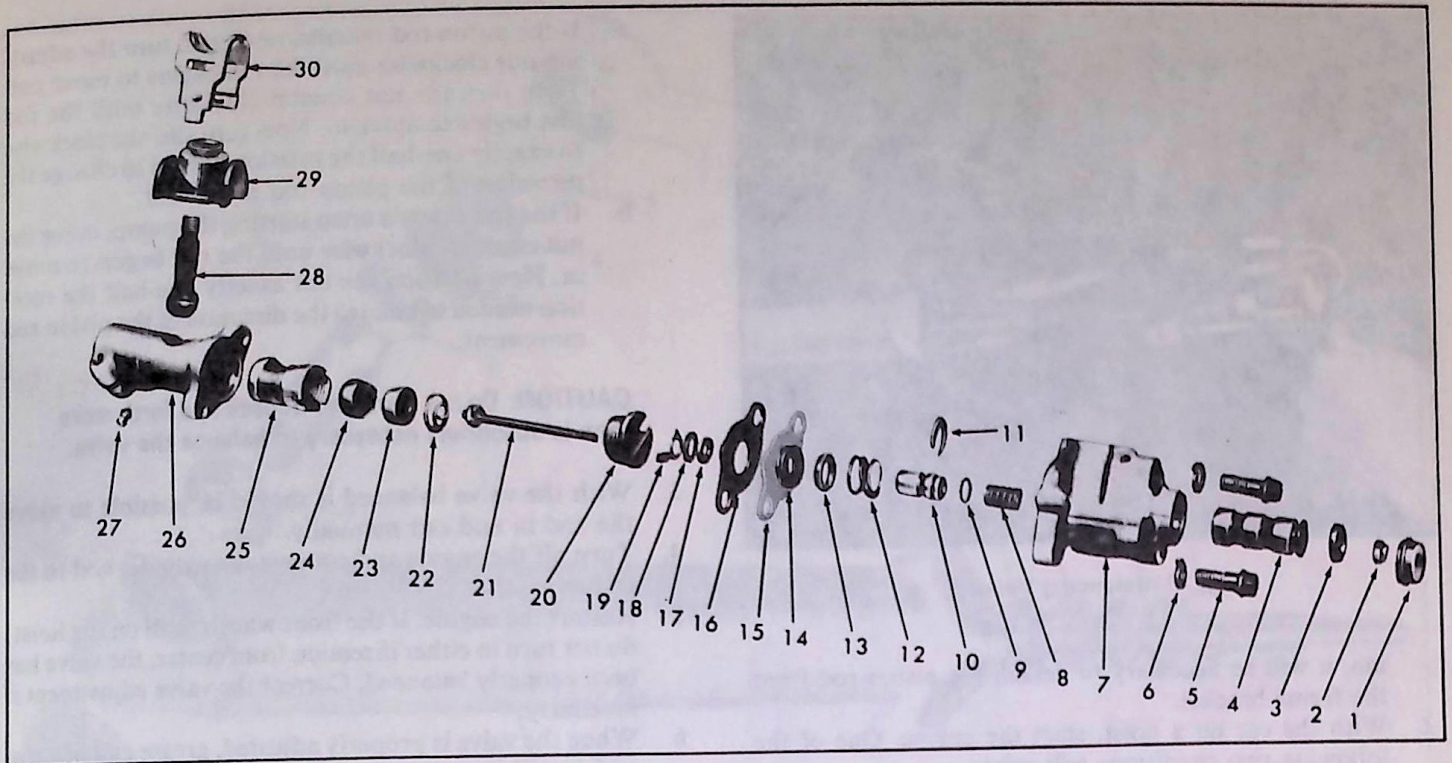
Power Steering Control Valve and Adapter—Exploded View
